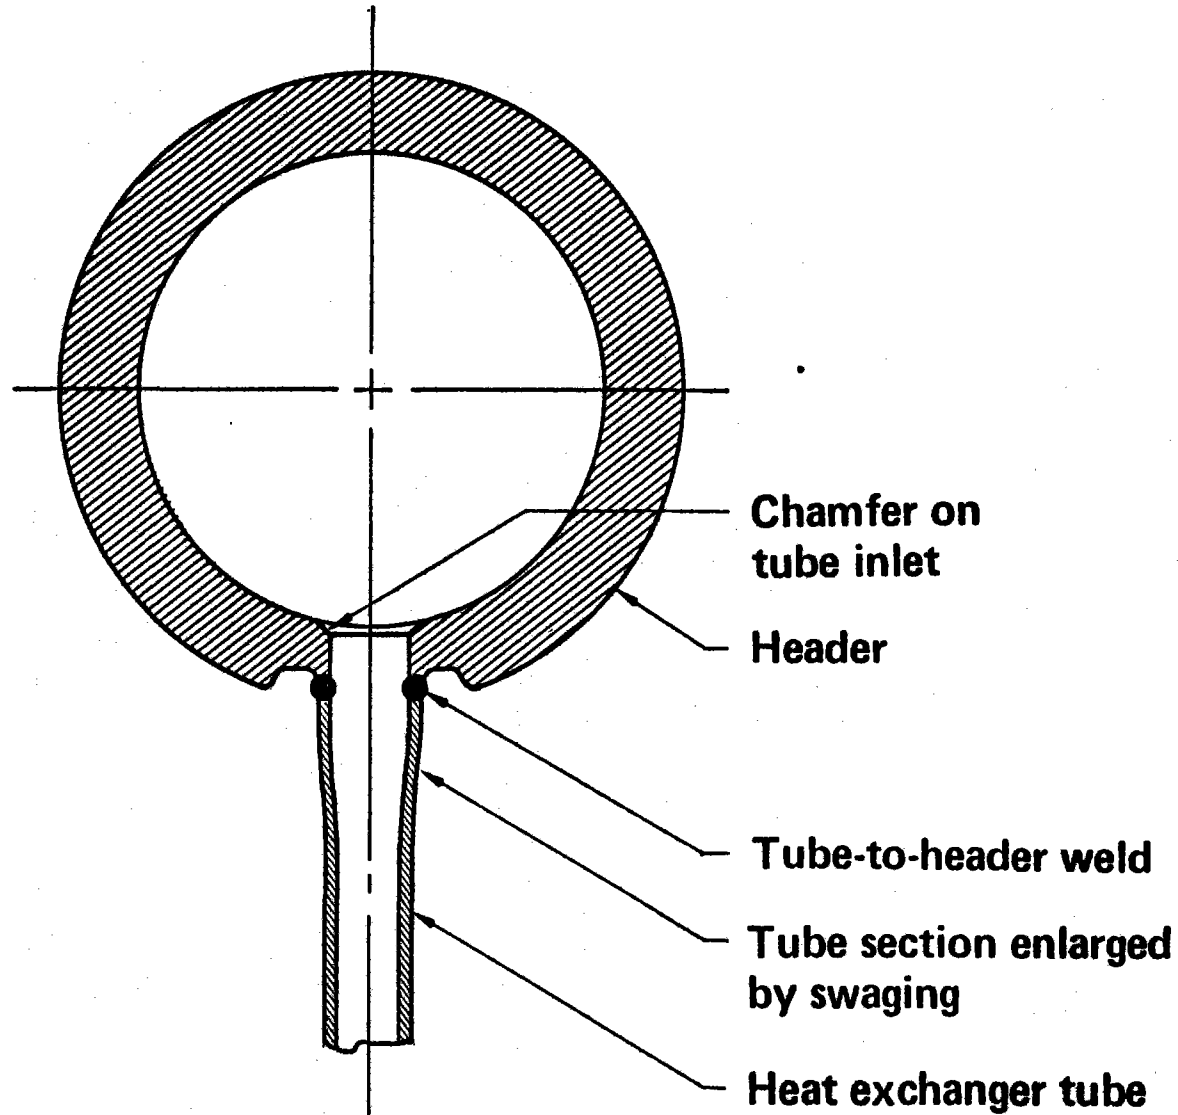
Effects of Tube-to-Header Weld-Bead Intrusion on Pressure Loss
